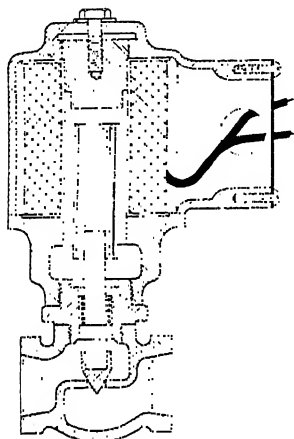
Cross section of solenoid-oil-shutoff valve. (Courtesy of Automatic Switch Company.)
